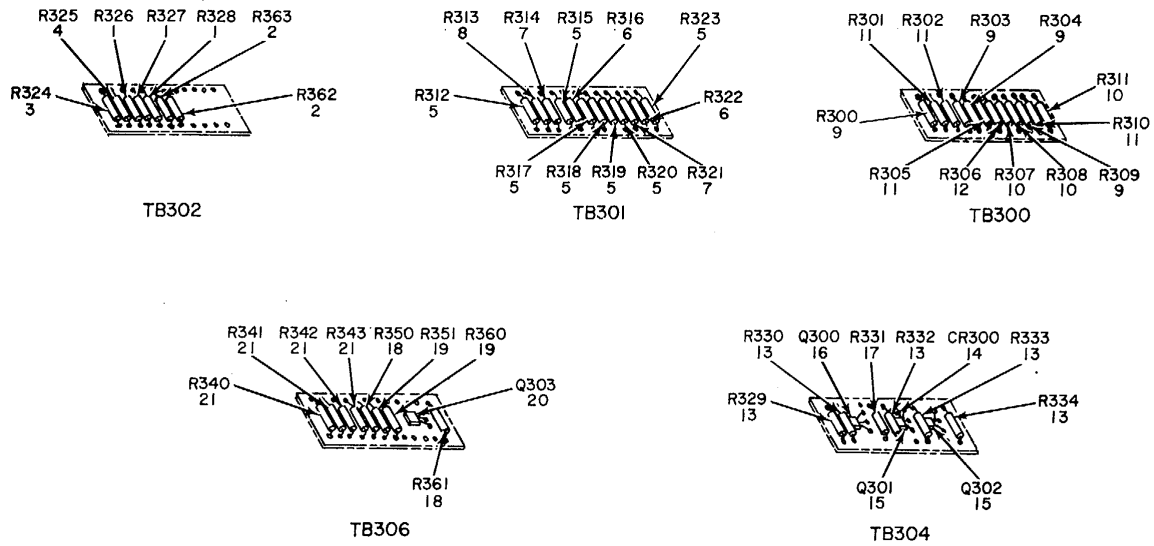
Adapter, Test MX-8838/ASM-417, Wiring Assembly.
